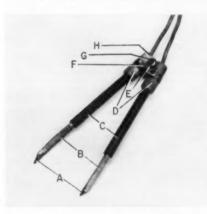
View of the soldering tool described by W2UVF. See text for details of components A through H.
